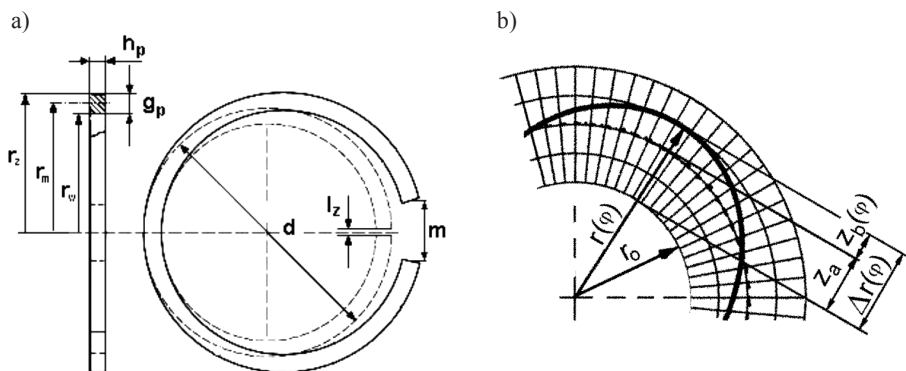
Sketch of a compression ring (a) and course of cylinder circumferential line (b); r_z, r_m, r_w – radii of a ring installed into cylinder, respectively of outer surface, neutral layer and inner surface; l_z, m – ring gap: compressed and free
